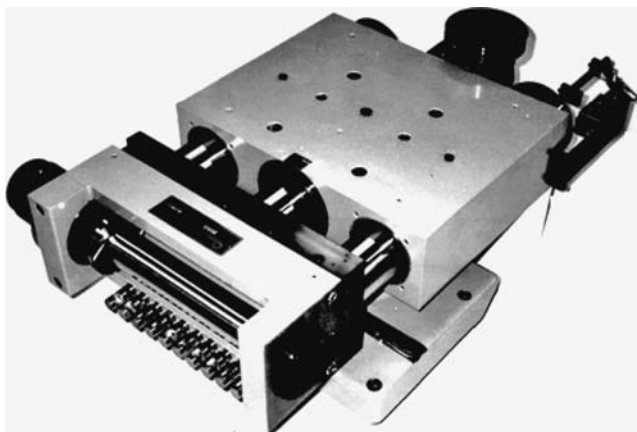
shows a triple-barrel infeed carrier for use on large centerless and multiwheel grinders. Custom designs can take up to 20 wide diamond roll assemblies. Note the series of coolant nozzles plumbed through the housing common to all the systems described.
